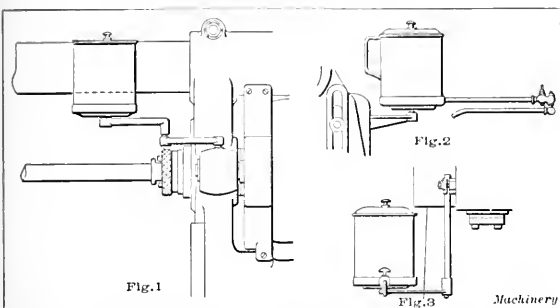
Drip-can mounted on Pivoted Bracket, with Jointed Delivery Pipe. Fig. 2. Drip-can with Vertical Adjustment. Fig. 3. Drip-can arranged for Vertical Adjustment.
